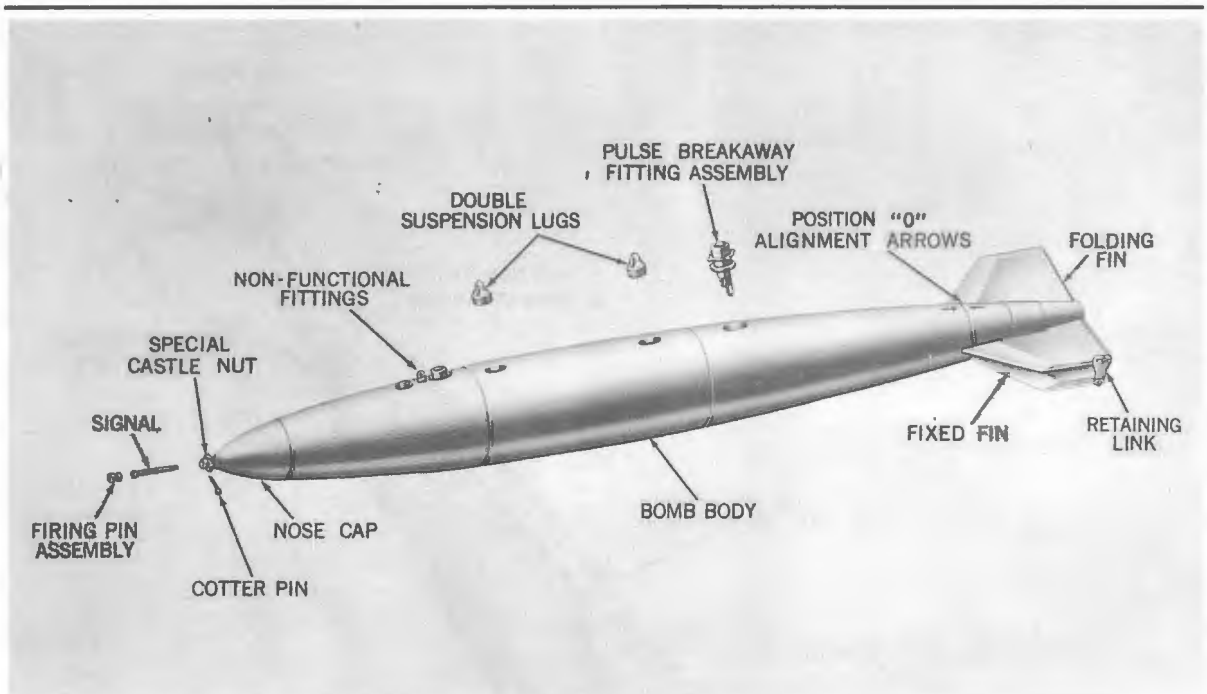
2000-lb Practice Bomb Mk 104 Mod 0, Exploded View.
